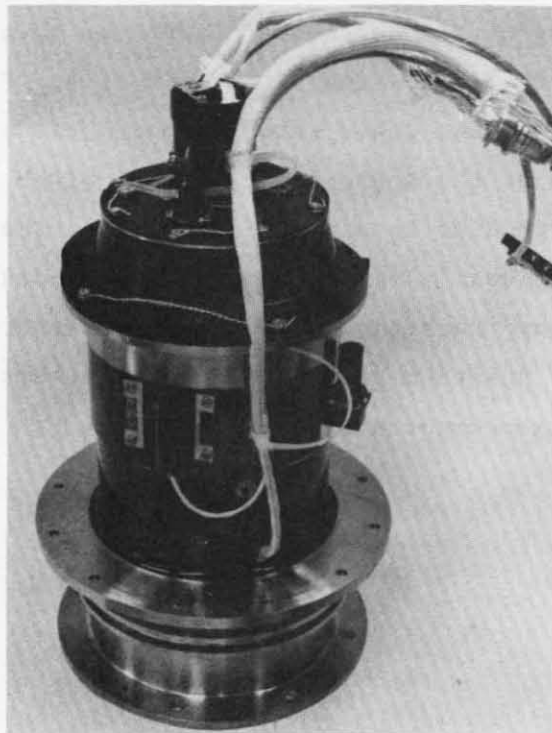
Intelsat IV Despin Bearing Assembly
